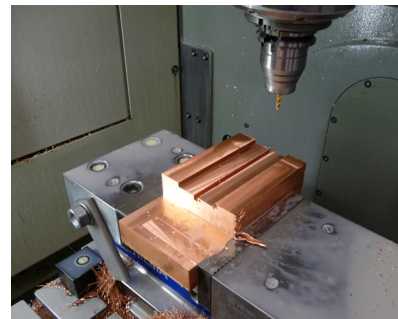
Manufacture of a girder extension aligned to the EUROTRANS parameters of the first sc CH-cavity.
